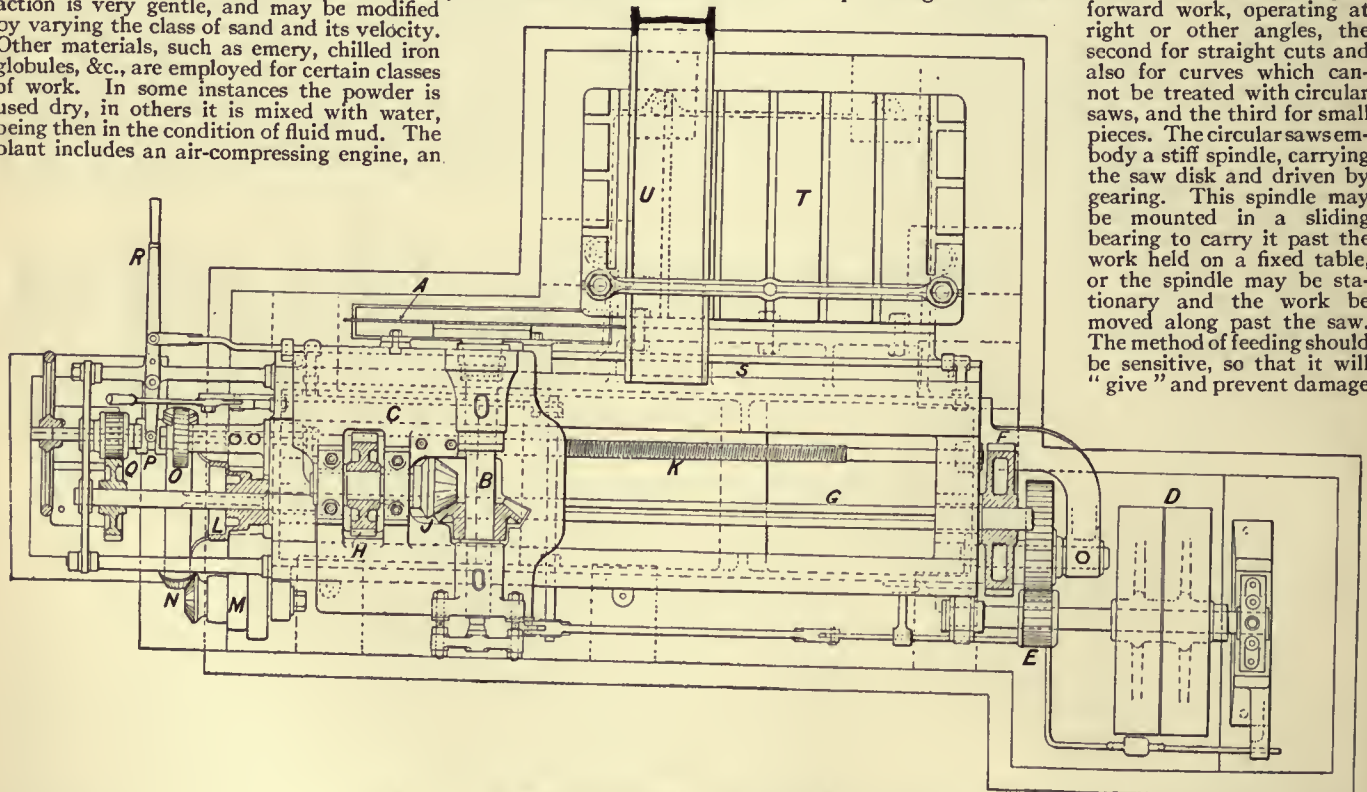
Cold-sawing Machine. (Isaac Hill & Son, Derby.)
